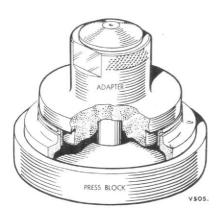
Pressing safety bearing into sealing housing with adapter T.78131 and press block T.78130.
